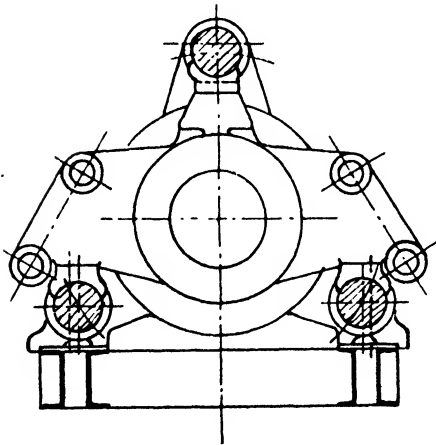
(b).—Former arrangement with main ram cross-head supported on press columns.
